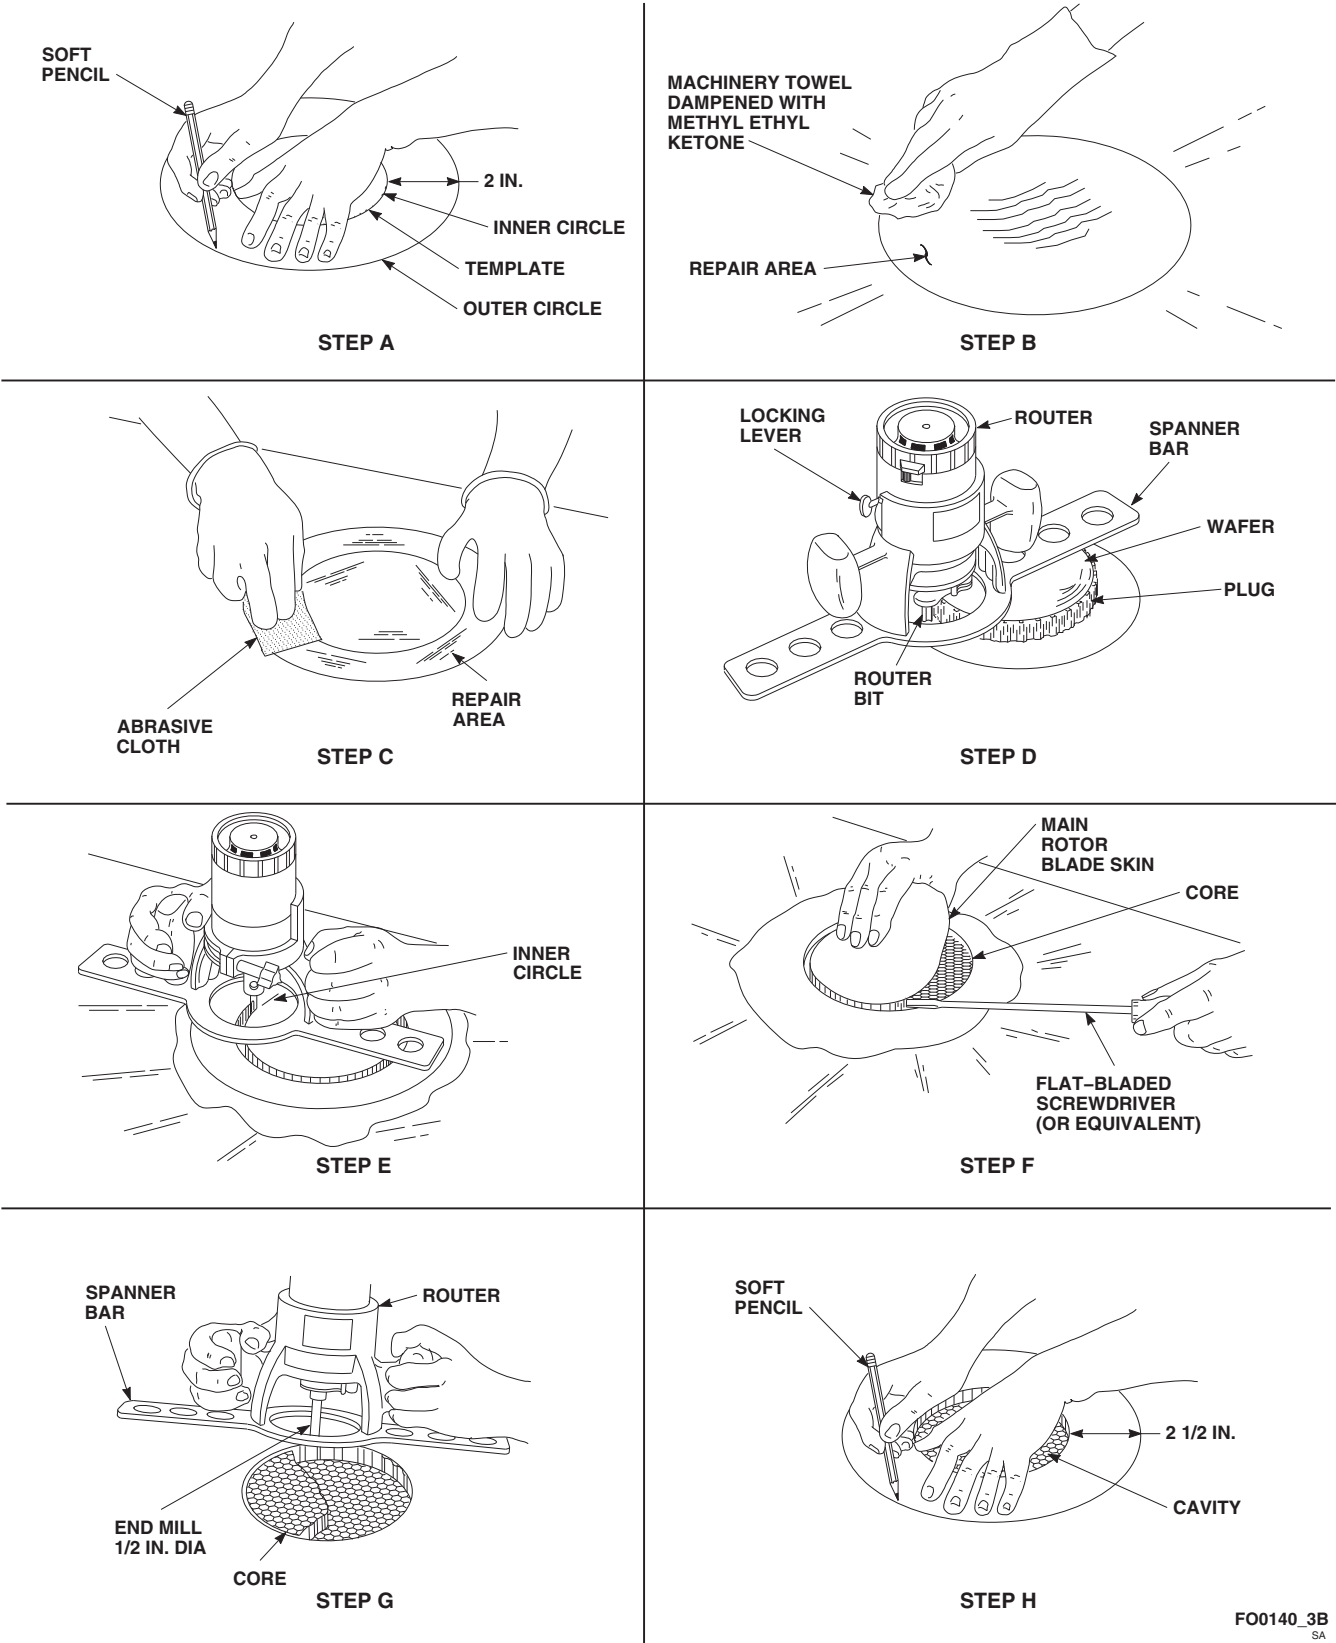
PLUG PATCH REPAIR (SHEET 3 OF 5)
